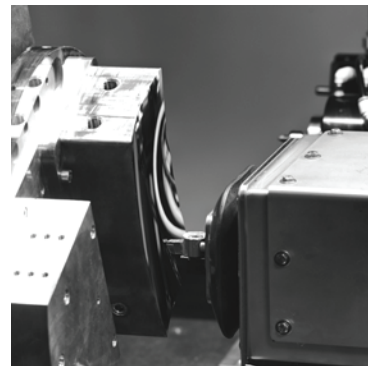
Off-axis machined HUD mold insert using a long stroke fast tool.
